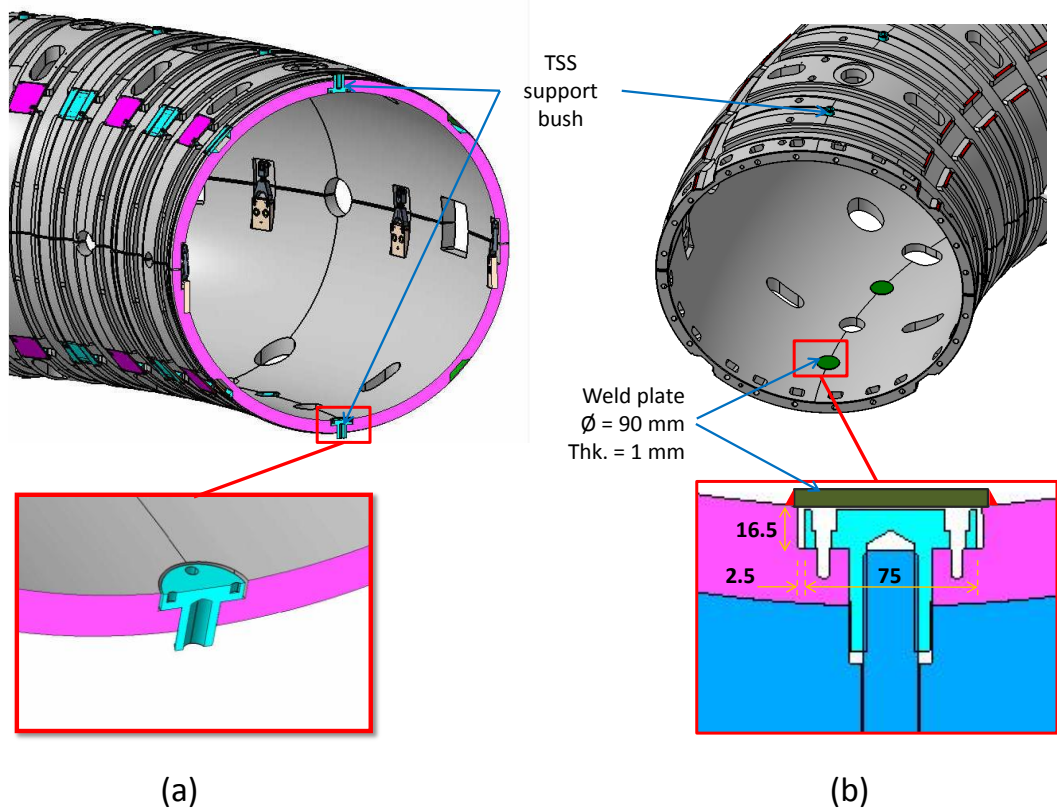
TSS support opening (a) support bush on TSS (b) closing of support openings
